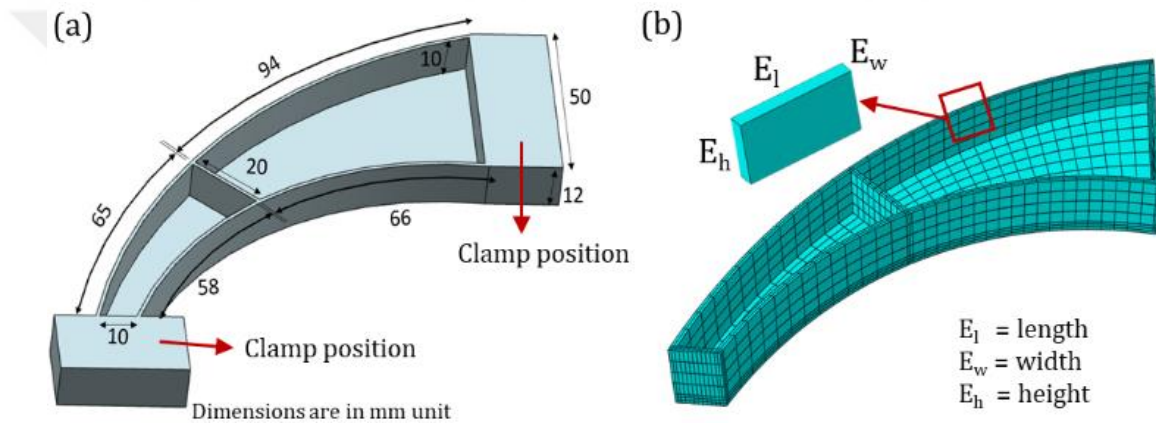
(a) CAD model of the workpiece, (b) Meshing of the FE model.
